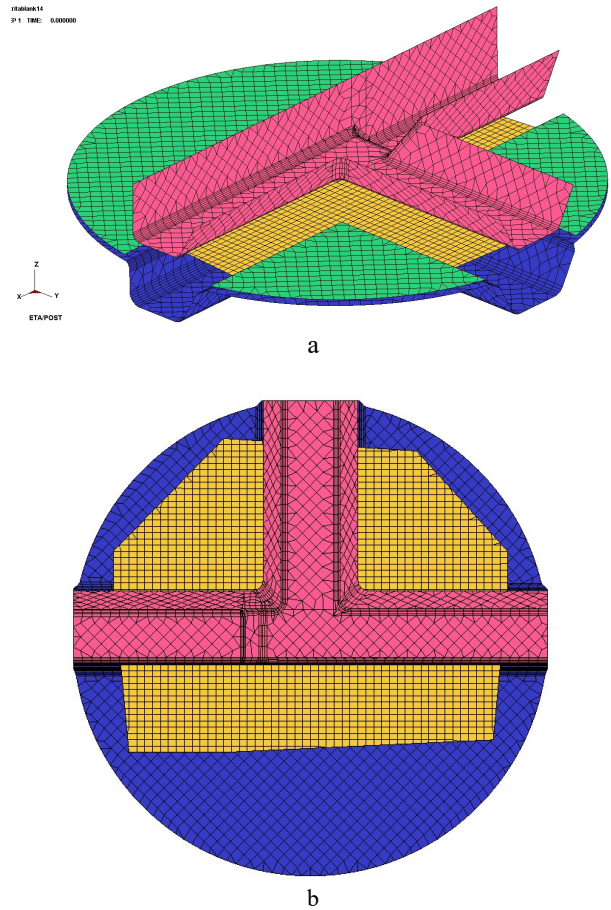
Geometric models of punch, die face, blank-holder, and blank: a – isometric view; b – top view.
